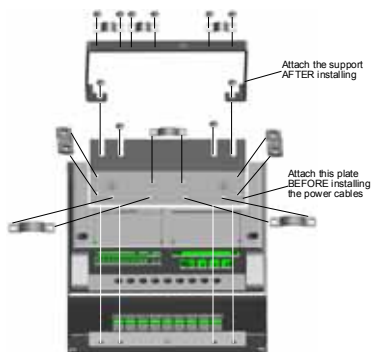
Attaching the PE-plate and API cable support, MI4 - MI5
